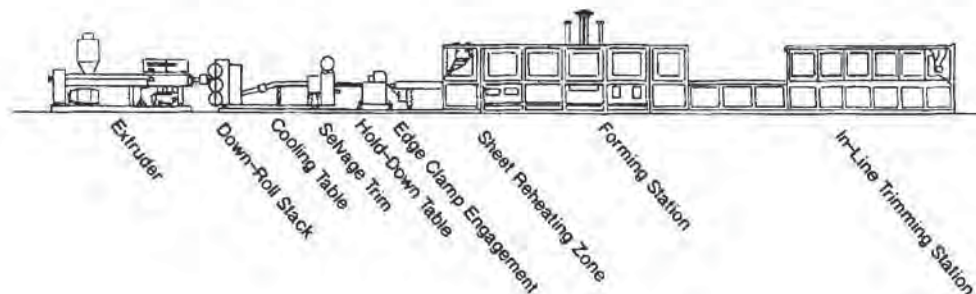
In-line heavy-gage sheet extrusion and thermoforming line—Cannon-Shelly [16]
